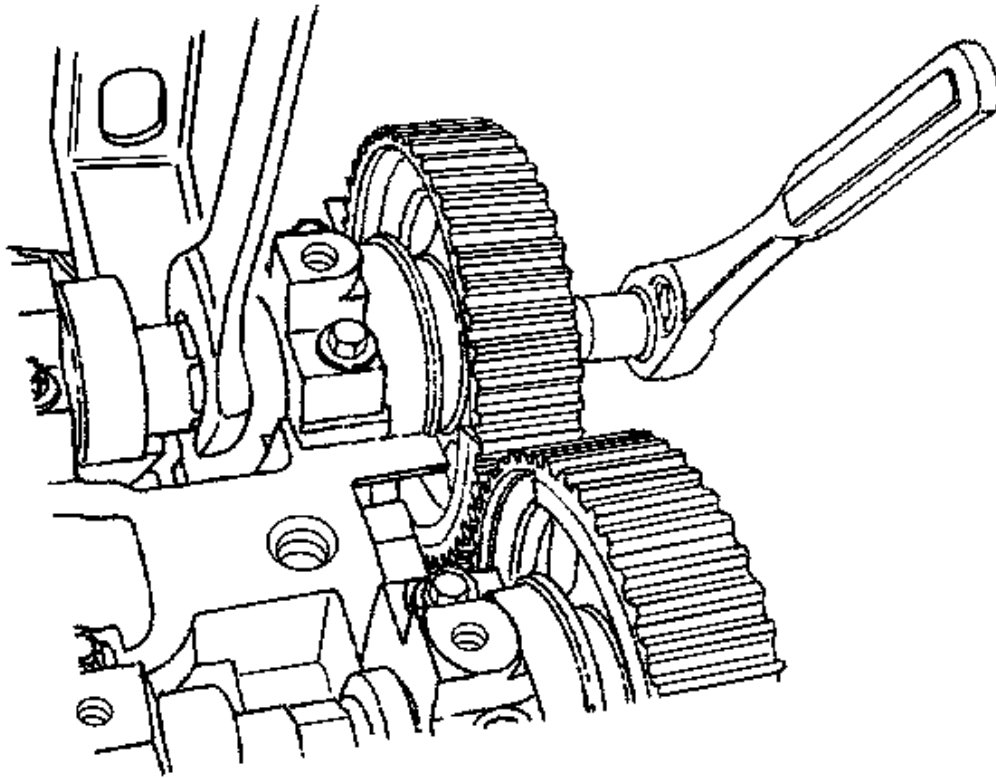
View Of Camshaft Gear Removal/Installation Procedure
